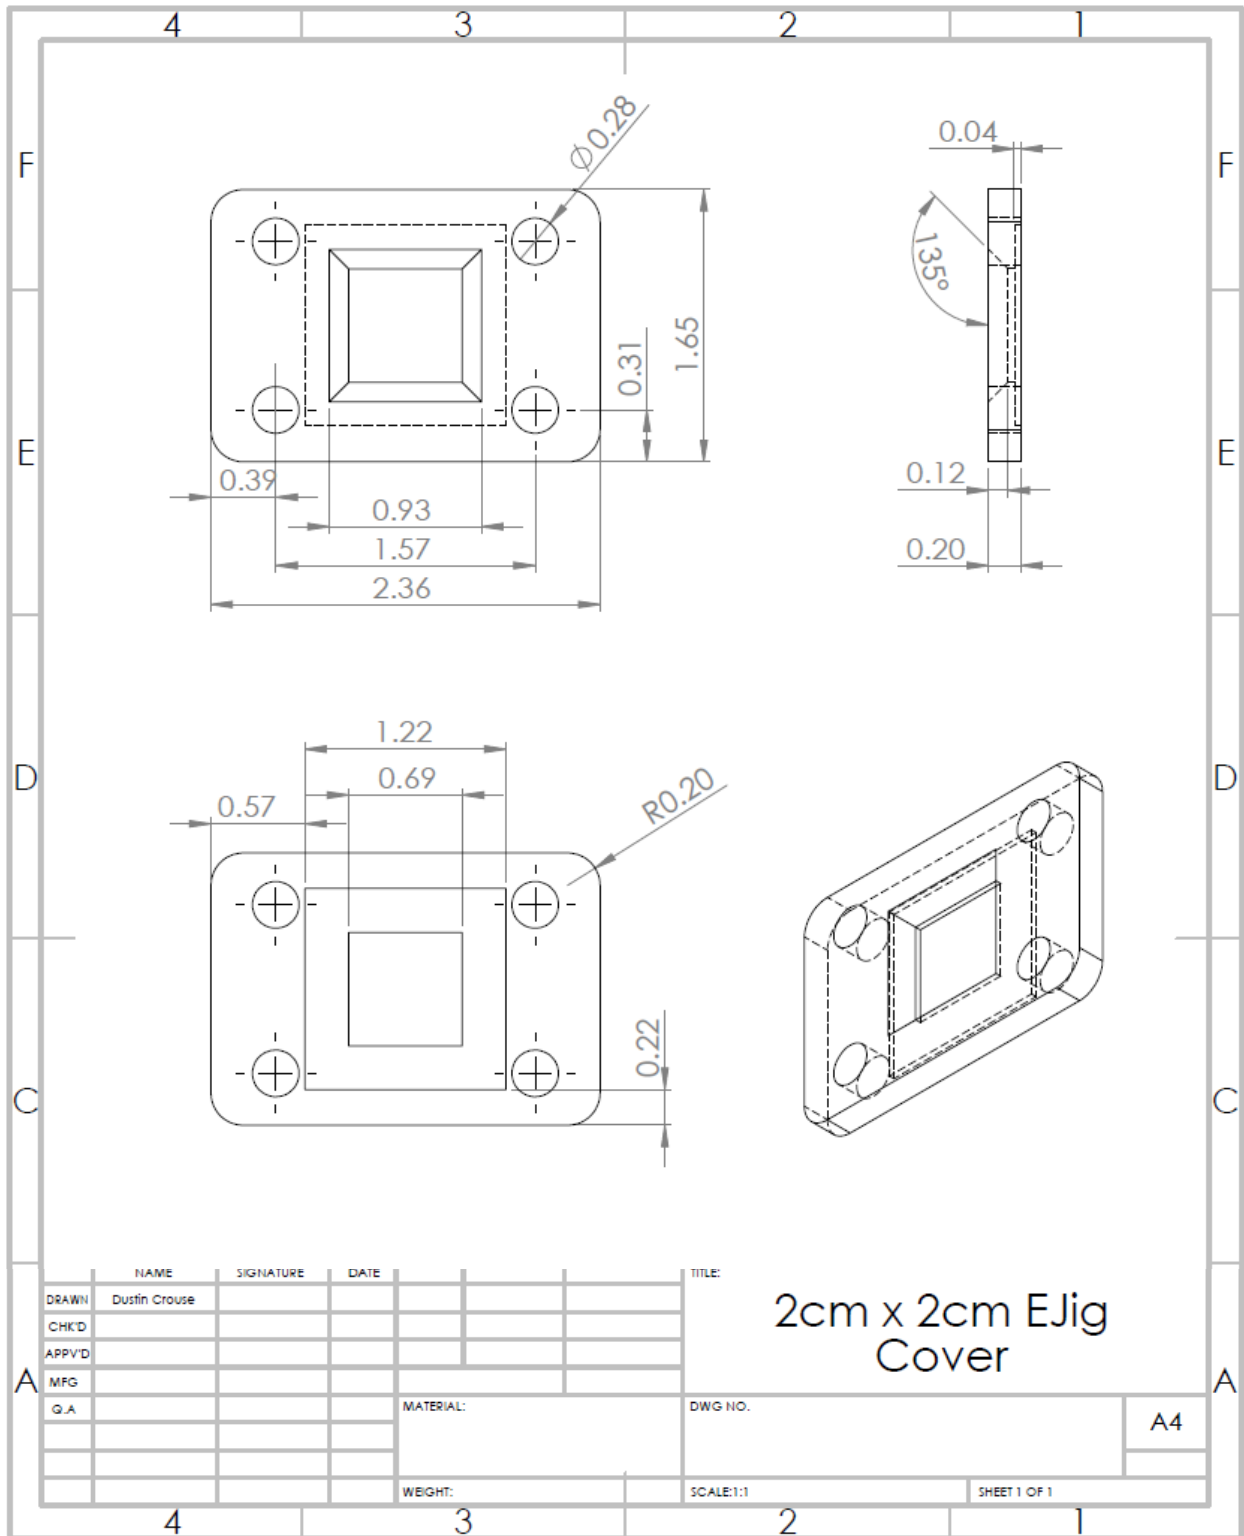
SolidWorks drawing file demonstrating electroplating jig cover dimensions
